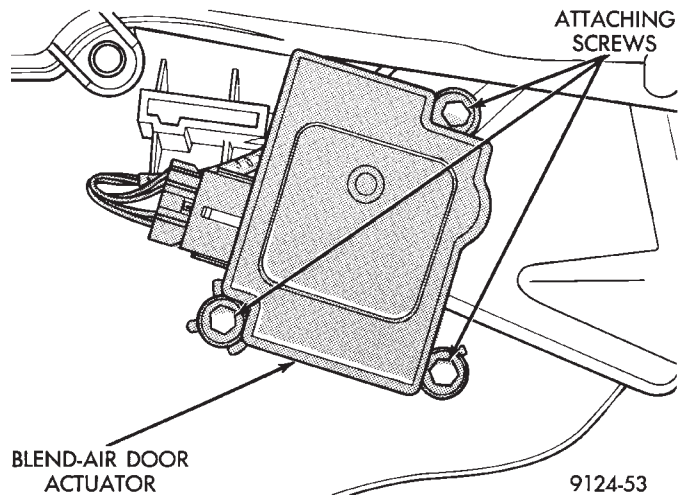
Blend-Air Door Actuator—Mode Door Actuator—View from bottom of A/C Housing
